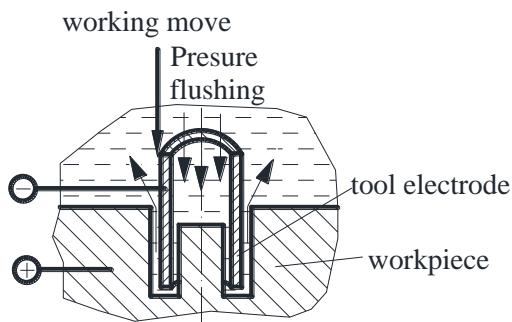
Machining scheme used in order to obtain small cylindrical parts by EDM
